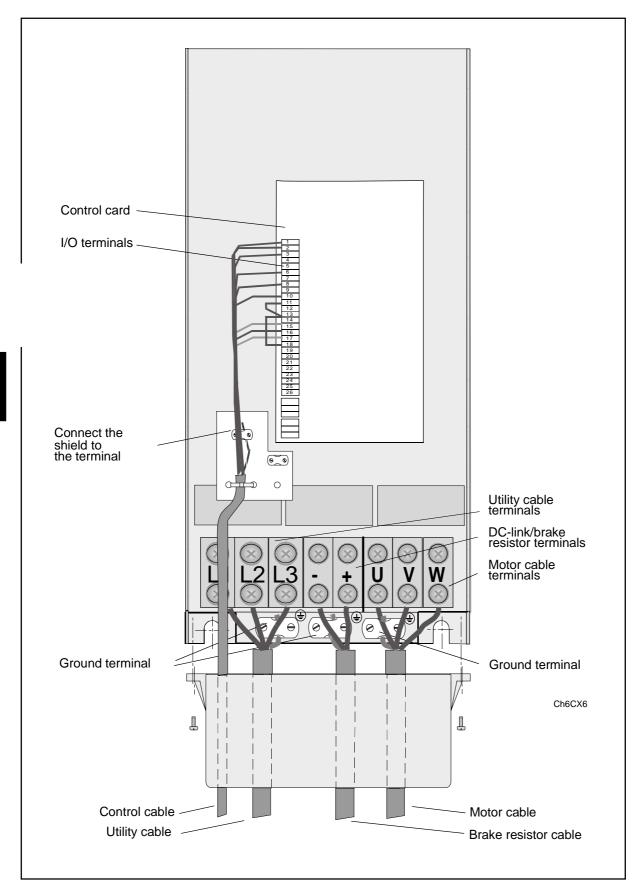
Cable assembly for open chassis: CX 0400-1000HP V 3 6.
